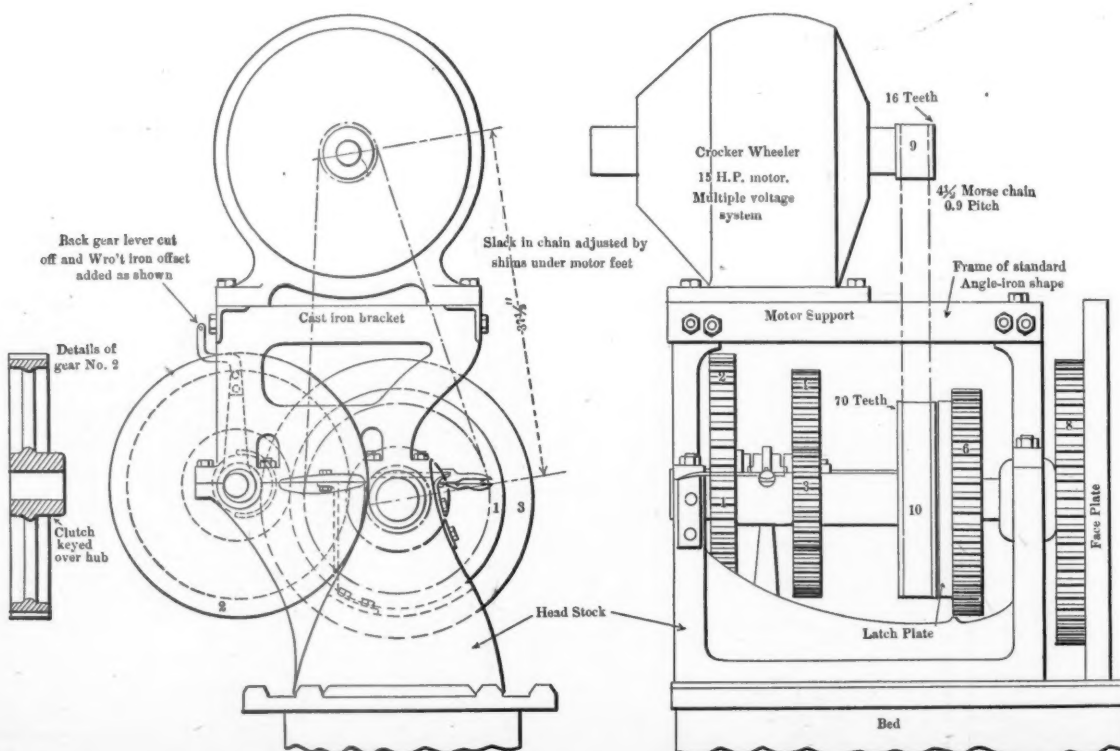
METHOD OF MOUNTING THE MOTOR UPON THE 42-IN. NILES TRIPLE-GEARED LATHE.
